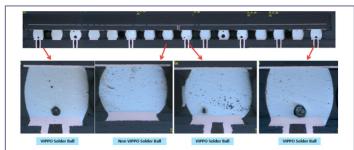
DDR4 TV Assembly Results with Solder Joint Encapsulant Material A
